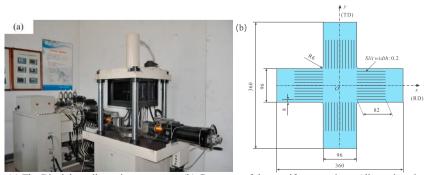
(a) The Biaxial tensile testing apparatus; (b) Geometry of the cruciform specimen (dimensions in mm)
